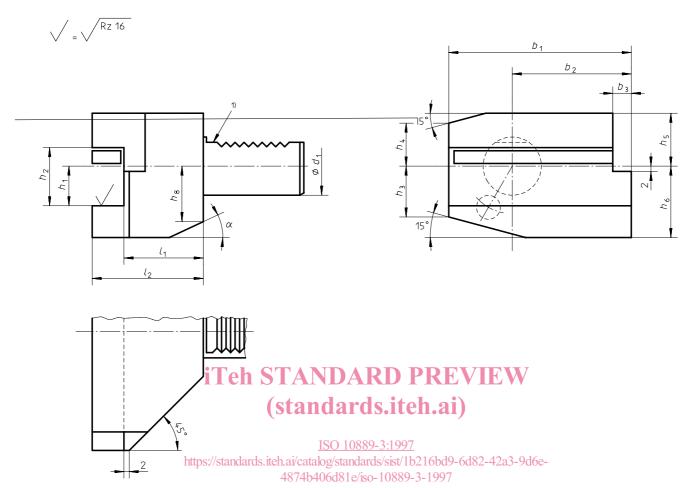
Type B4 tool holder, overhead, left-hand, short
